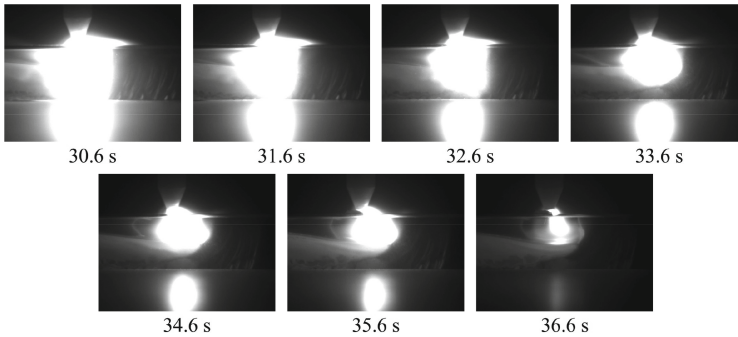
Arc extinction process in K-TIG welding [44]
